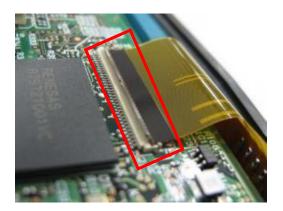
1 Check that there is no scrap of the plastic caused by Tapping screws inside LCD screen or Upper and Lower LCD case. 2 Assemble Packing A [1] to Upper LCD case [2]. Note Be careful to assemble Packing so that its orientation should be fit with the shape of the groove. Fig.24 3 Assemble Upper LCD case [2], LCD and Lower LCD case. 4 Pass Harness of LCD [1] through the hole of Lower LCD case, then route it to the circuit board side. 5 Assemble Switch assembly with Tapping screws 2.3x8 (5 pcs). Fig.25 6 Connect Harness of Switch assembly to LCD assembly. Fig.26 7 Connect FFC of LCD to the circuit board of LCD assembly. Note • FFC should be routed along the inside of Connector and insert it firmly. · Insert FFC straight so that it does not tilt. Turn the lock of FFC connector firmly.
